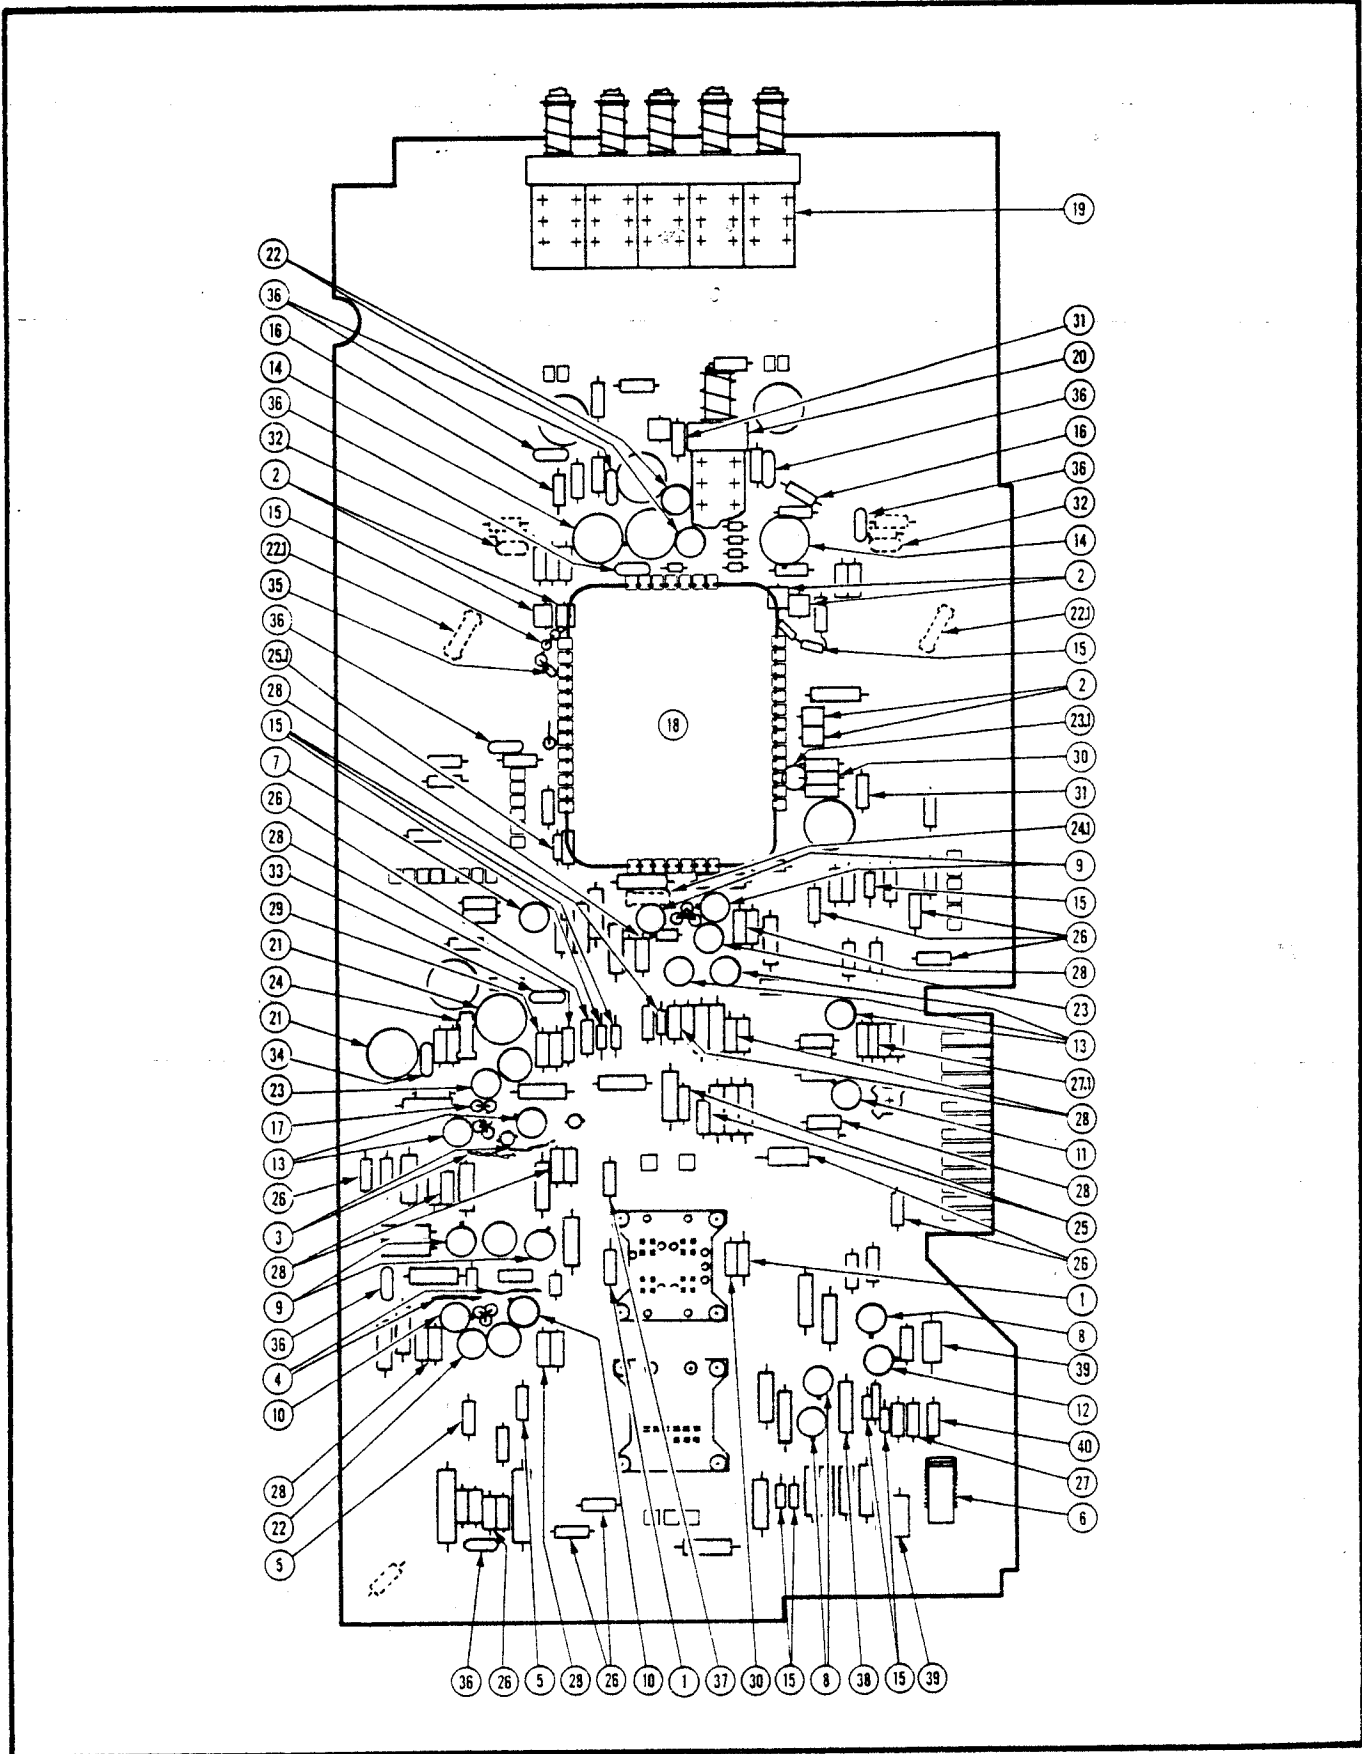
A5 Circuit Board Assembly, Vertical (sheet 1 of 4).
